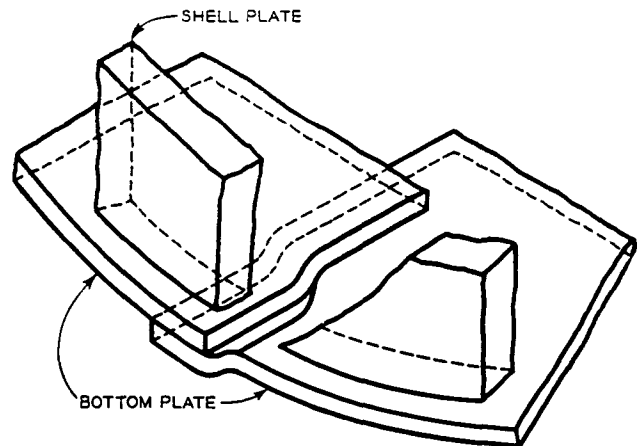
Method for Preparing Lap-Welded Bottom Plates Under Tank Shell [See Par. 3.2.2(a)].
